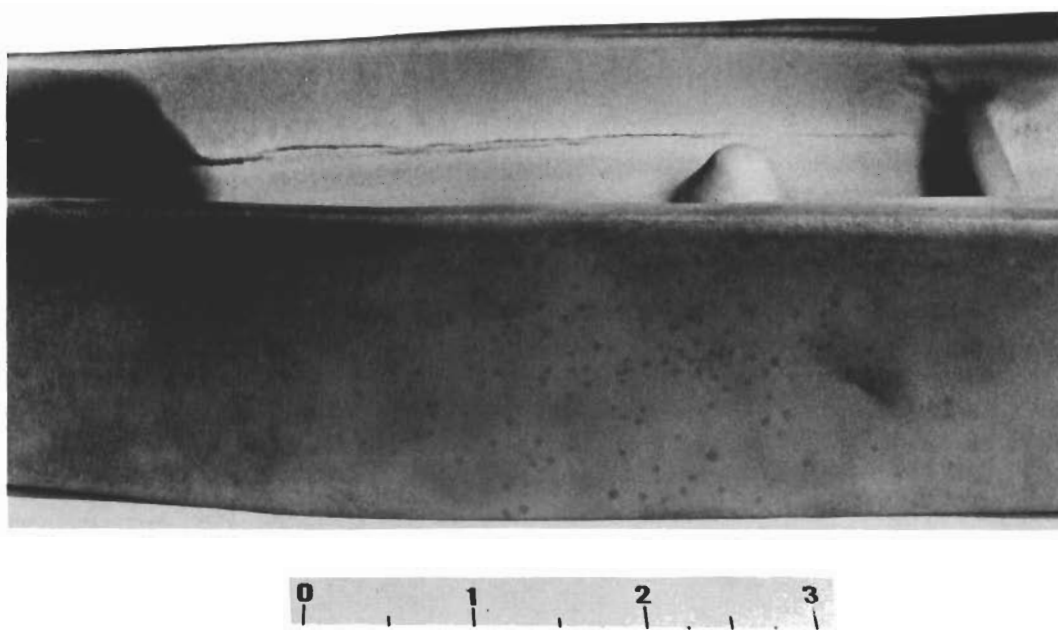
Close-Up of Two of the Inconel 718 Forgings Produced with the 400,000 Foot-Pound CEFF-Type HERF Machine and Delivered to TRW.
